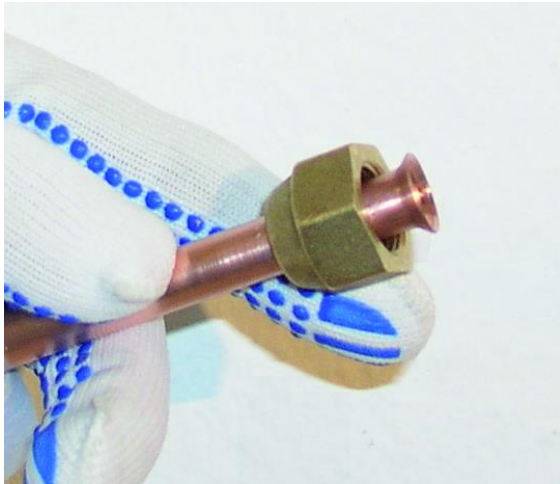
Flared connection for refrigerant transfer tubes (Source: HEAT GmbH)
